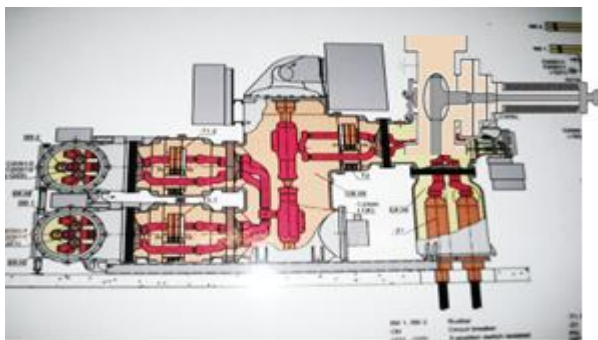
Siemens make Gas insulated switchgear with test adaptor mounted
